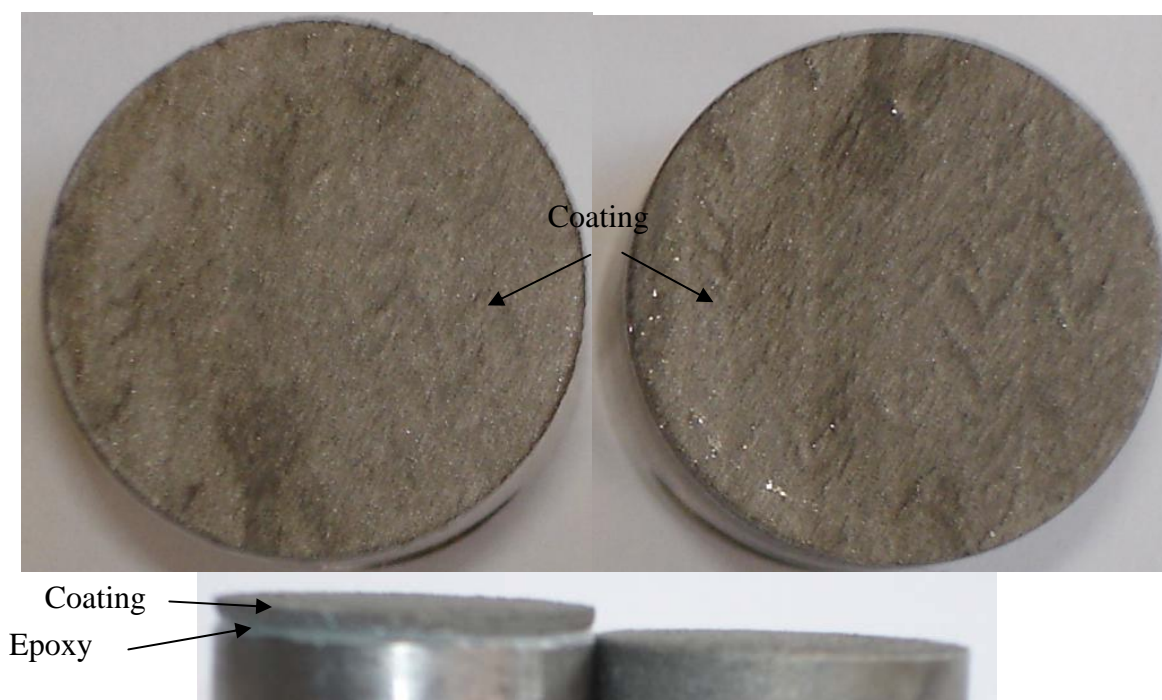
Top and side views of Ni-30 wt. % Ni coated BN (103 μm) coating surface after fracture showing adhesive failure at coating-substrate interface
